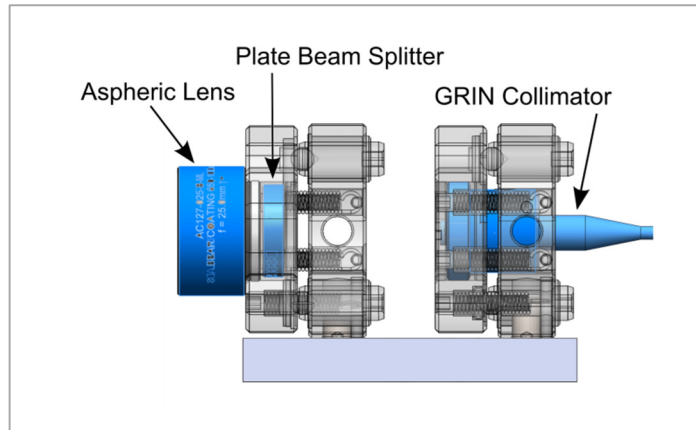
Cutaway of kinematic mounts to show location of critical optical components.
